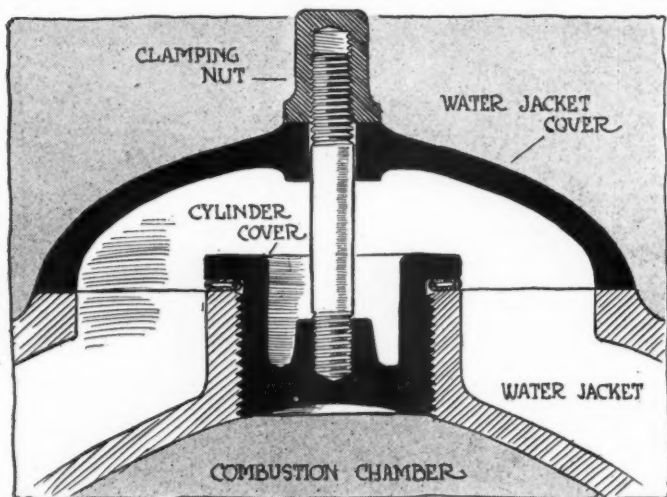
Securing cylinder-head plug in Cottin &amp; Desgouttes motor in 16-horsepower chassis
